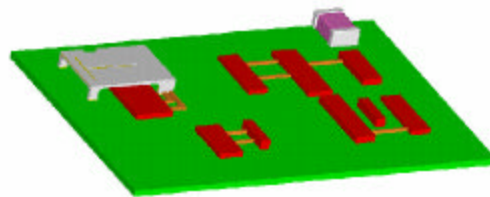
Possible layout illustrating TTA covering components on printed circuit board (PCB).
